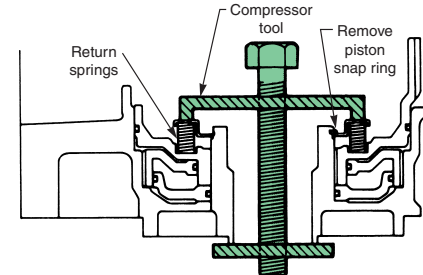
A special compressor must be used to remove the clutch apply piston in order to get at the seals of the clutch assembly. Universal tools are available that fit all types of assemblies. (DaimlerChrysler)
